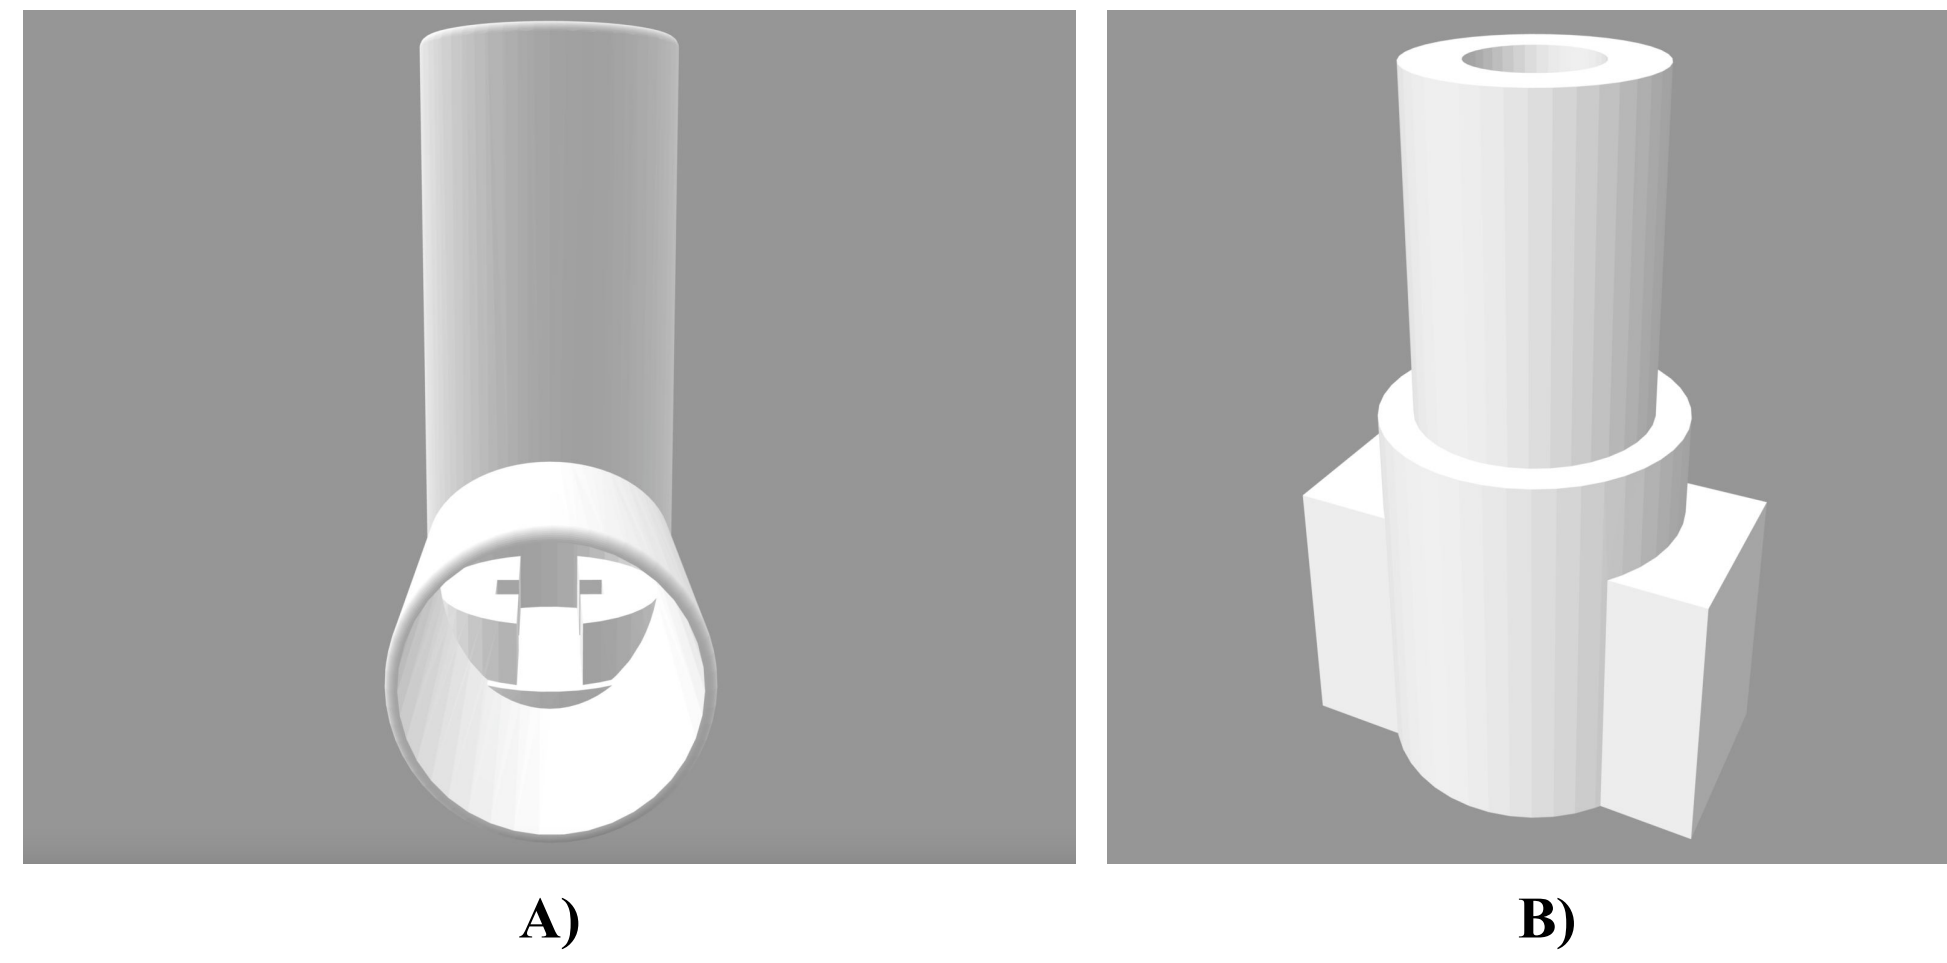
Final prototype 3D models for the A) mouthpiece and B) actuator nozzle.
